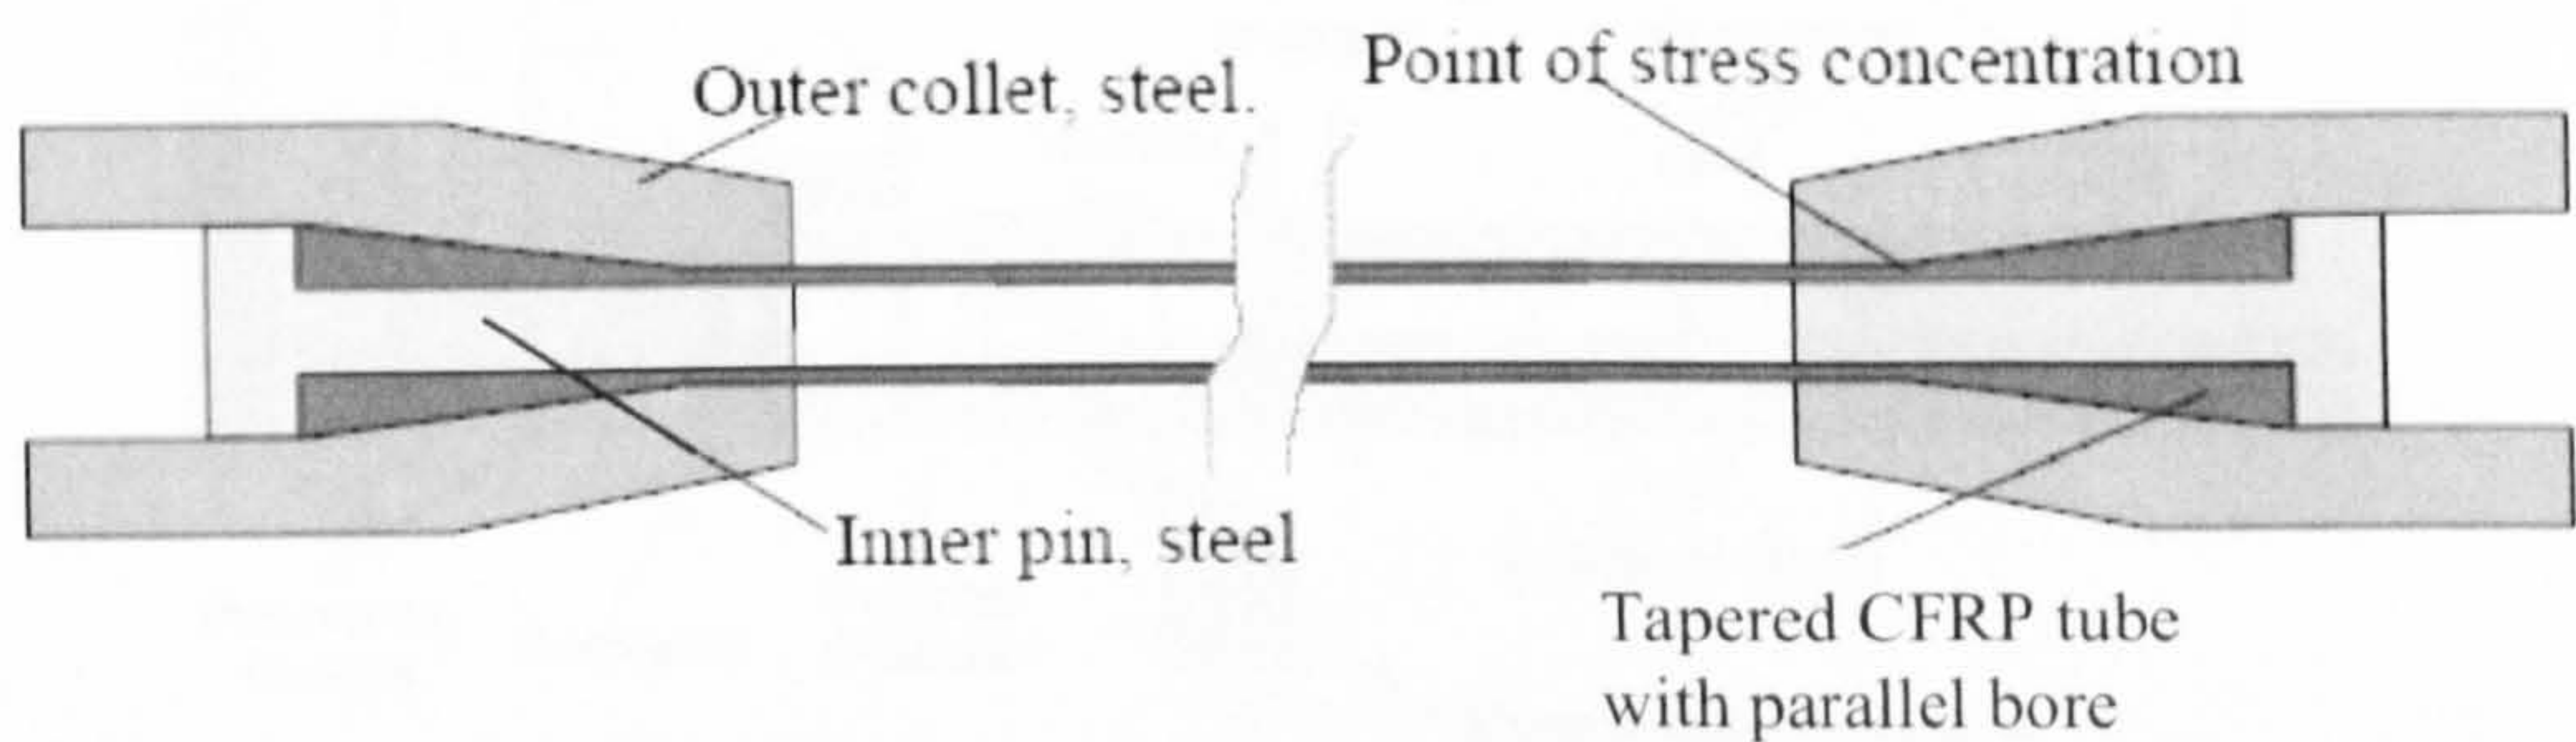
Tapered Mechanical Seat Joint Design²⁵
